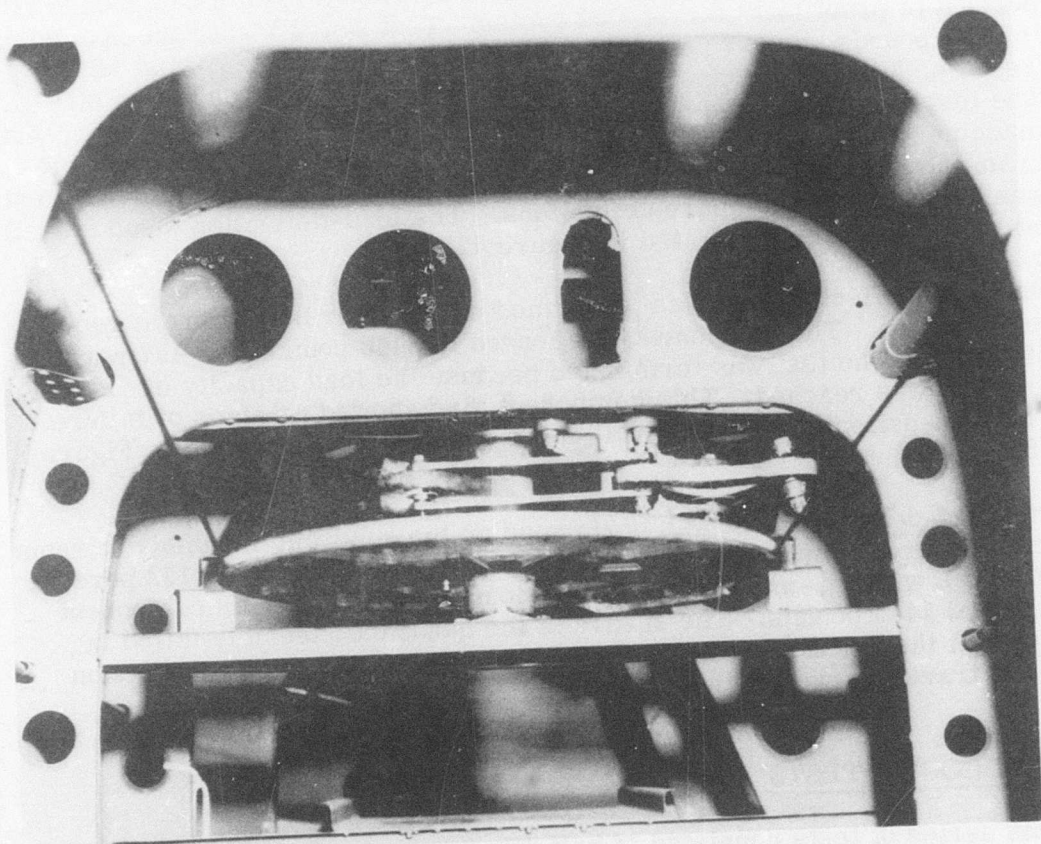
Molded Quadrant Assembly Installed in UH-1D Aircraft.
